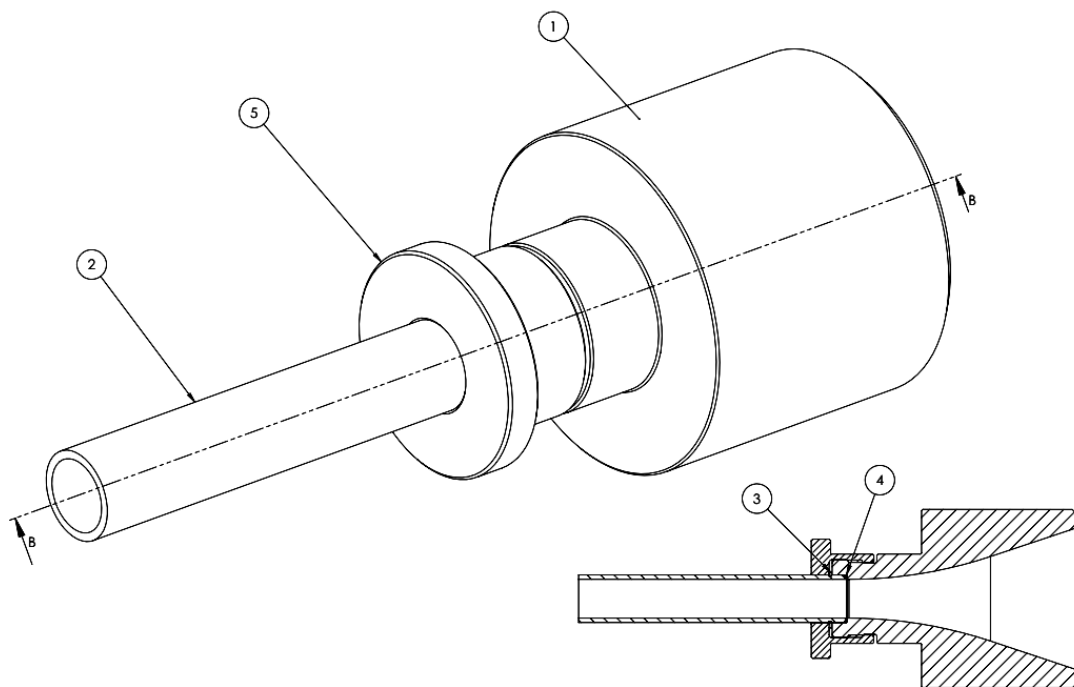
Cross-sectional and 3-D views of the assembly drawing of the modified jet nozzle rig which consists of the following components: (1) Pipe adaptor insert with a smoothly converging section (to eliminate separation noise), (2) cylindrical pipe of circular cross-section, (3) circular clip, (4) O-ring and (5) a collar.
